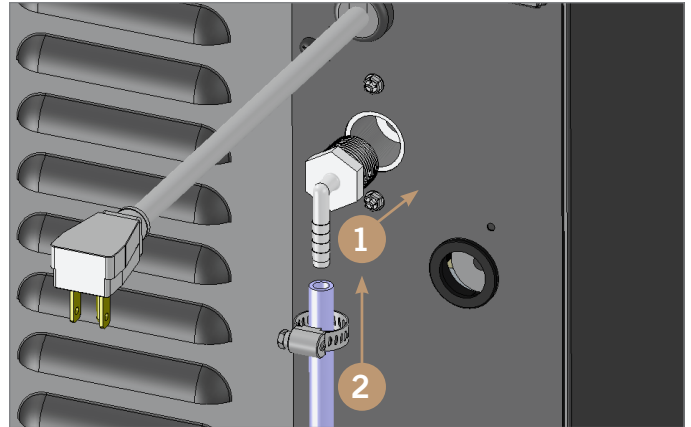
Be sure to tightly clamp the drain line onto the barbed fitting. Thread sealant required.
